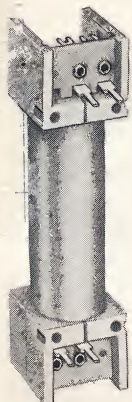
Epoxy resin terminal board assembly (Fig. 2) pressed into mortises molded into the Nylon support. This construction assures permanently rigid positioning of the terminal supports and terminal pins.
